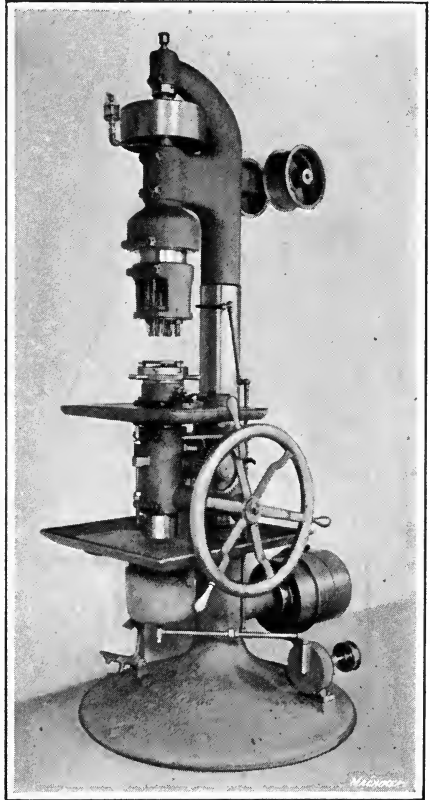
Multiple Drilling Machine with Indexing Fixture to Locate Work for Six Successive Operations required to drill Eighty-four Holes, as shown in Fig. 26
